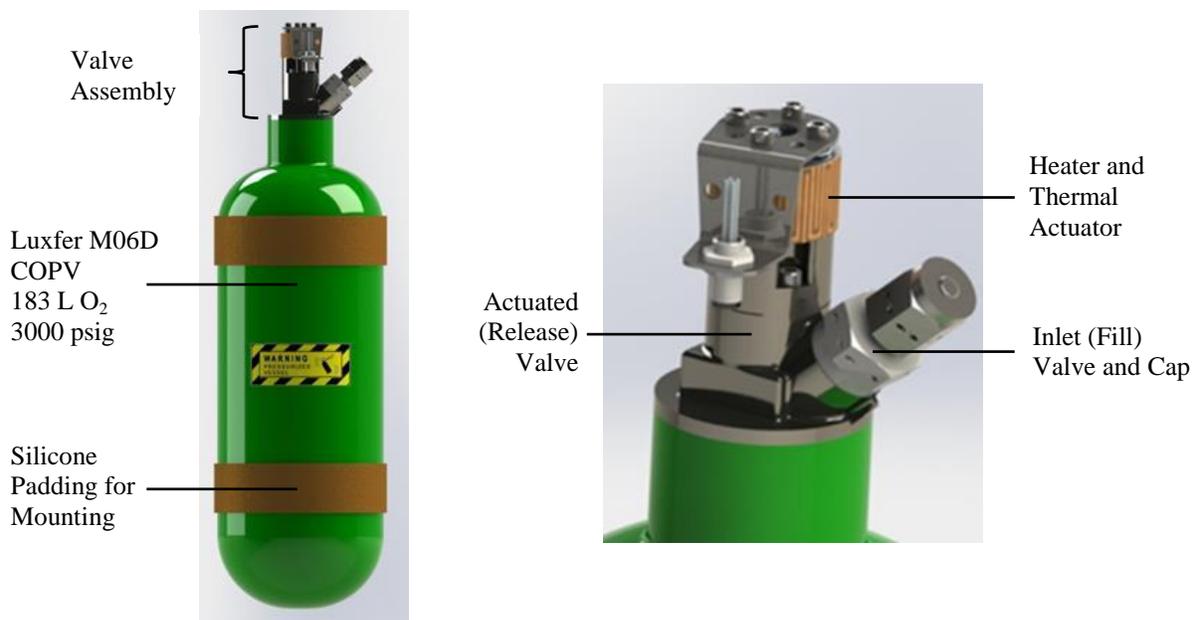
Cylinder assembly and valve assembly with major oxygen system components identified.
